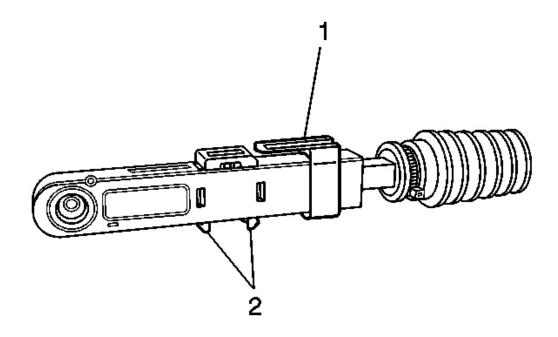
View Of Secondary Lock Tab Courtesy of GENERAL MOTORS CORP.
